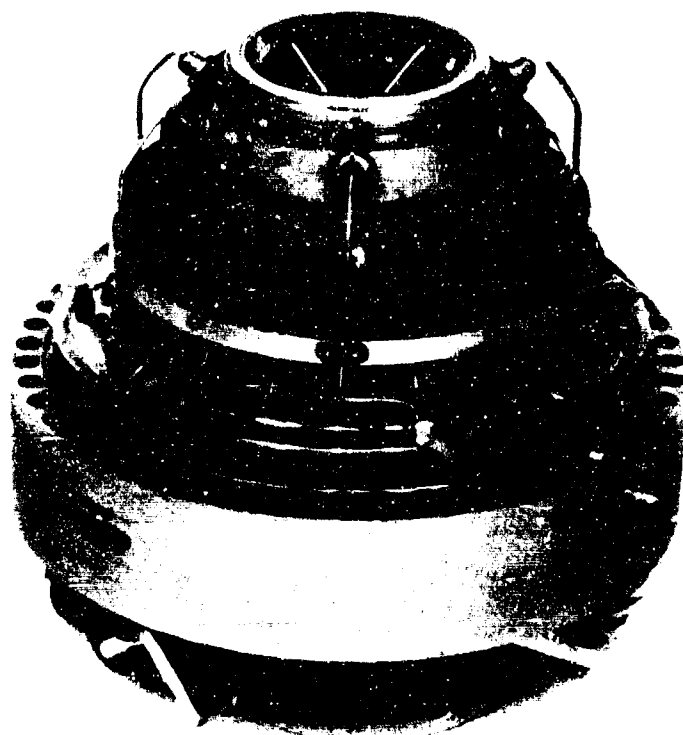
Fuel Turbopump Duct and Turbine Simulator Assembly
